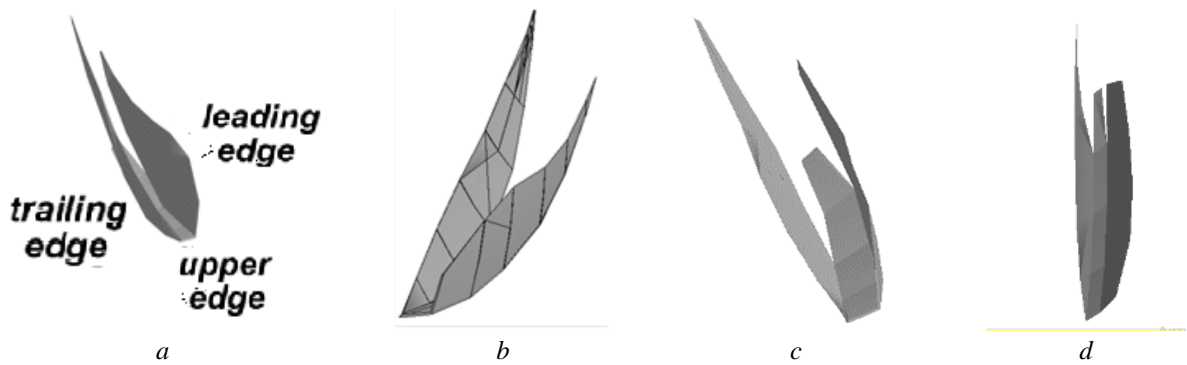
Three-dimensional model of undeformed chips during complete machining in one pass in different views
